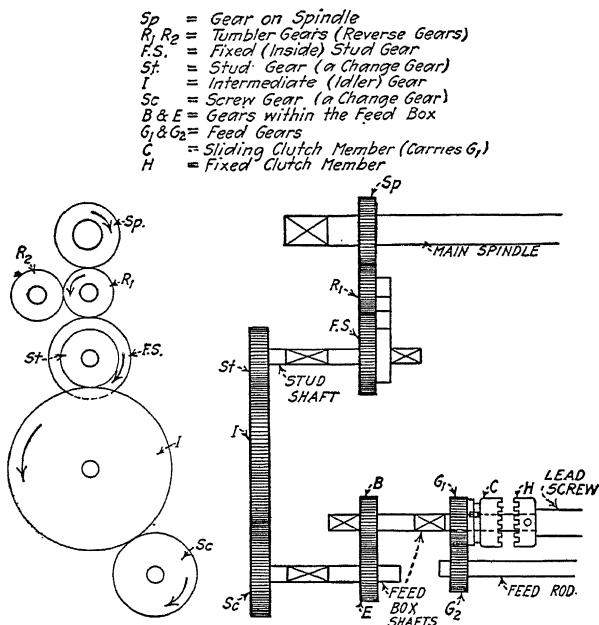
Gearing from main spindle of lathe to feed rod and lead screw.
